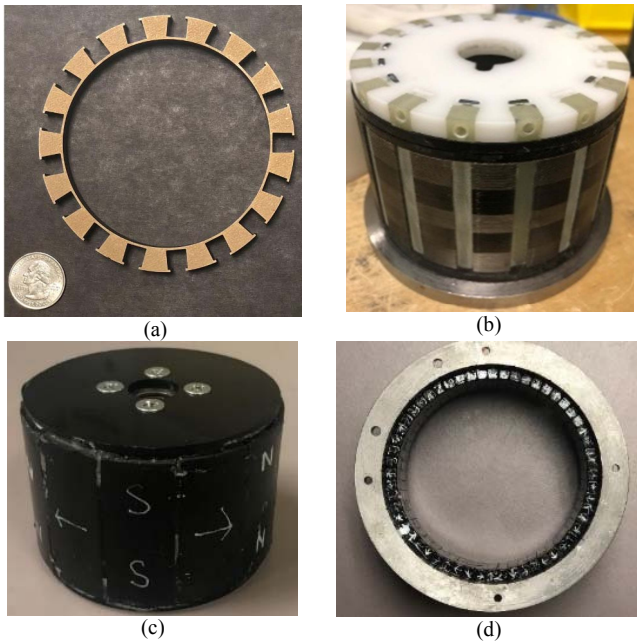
(a) Cage rotor lamination. (b) Assembled cage rotor with Garolite supporting bars. (c) Assembled inner rotor with Halbach array magnet embedded. (d) Assembled outer rotor with Halbach array magnet embedded.
